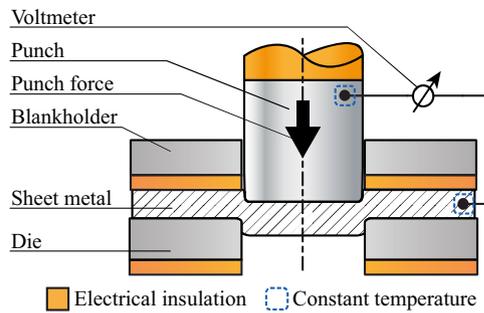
Schematic drawing of a tool-workpiece thermocouple for temperature measurement during embossing and blanking operations.
